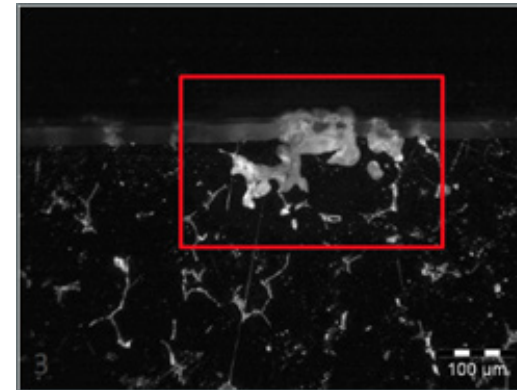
Pitting due to heavy pickling. Large areas of the aluminium casting structure have disintegrated.
